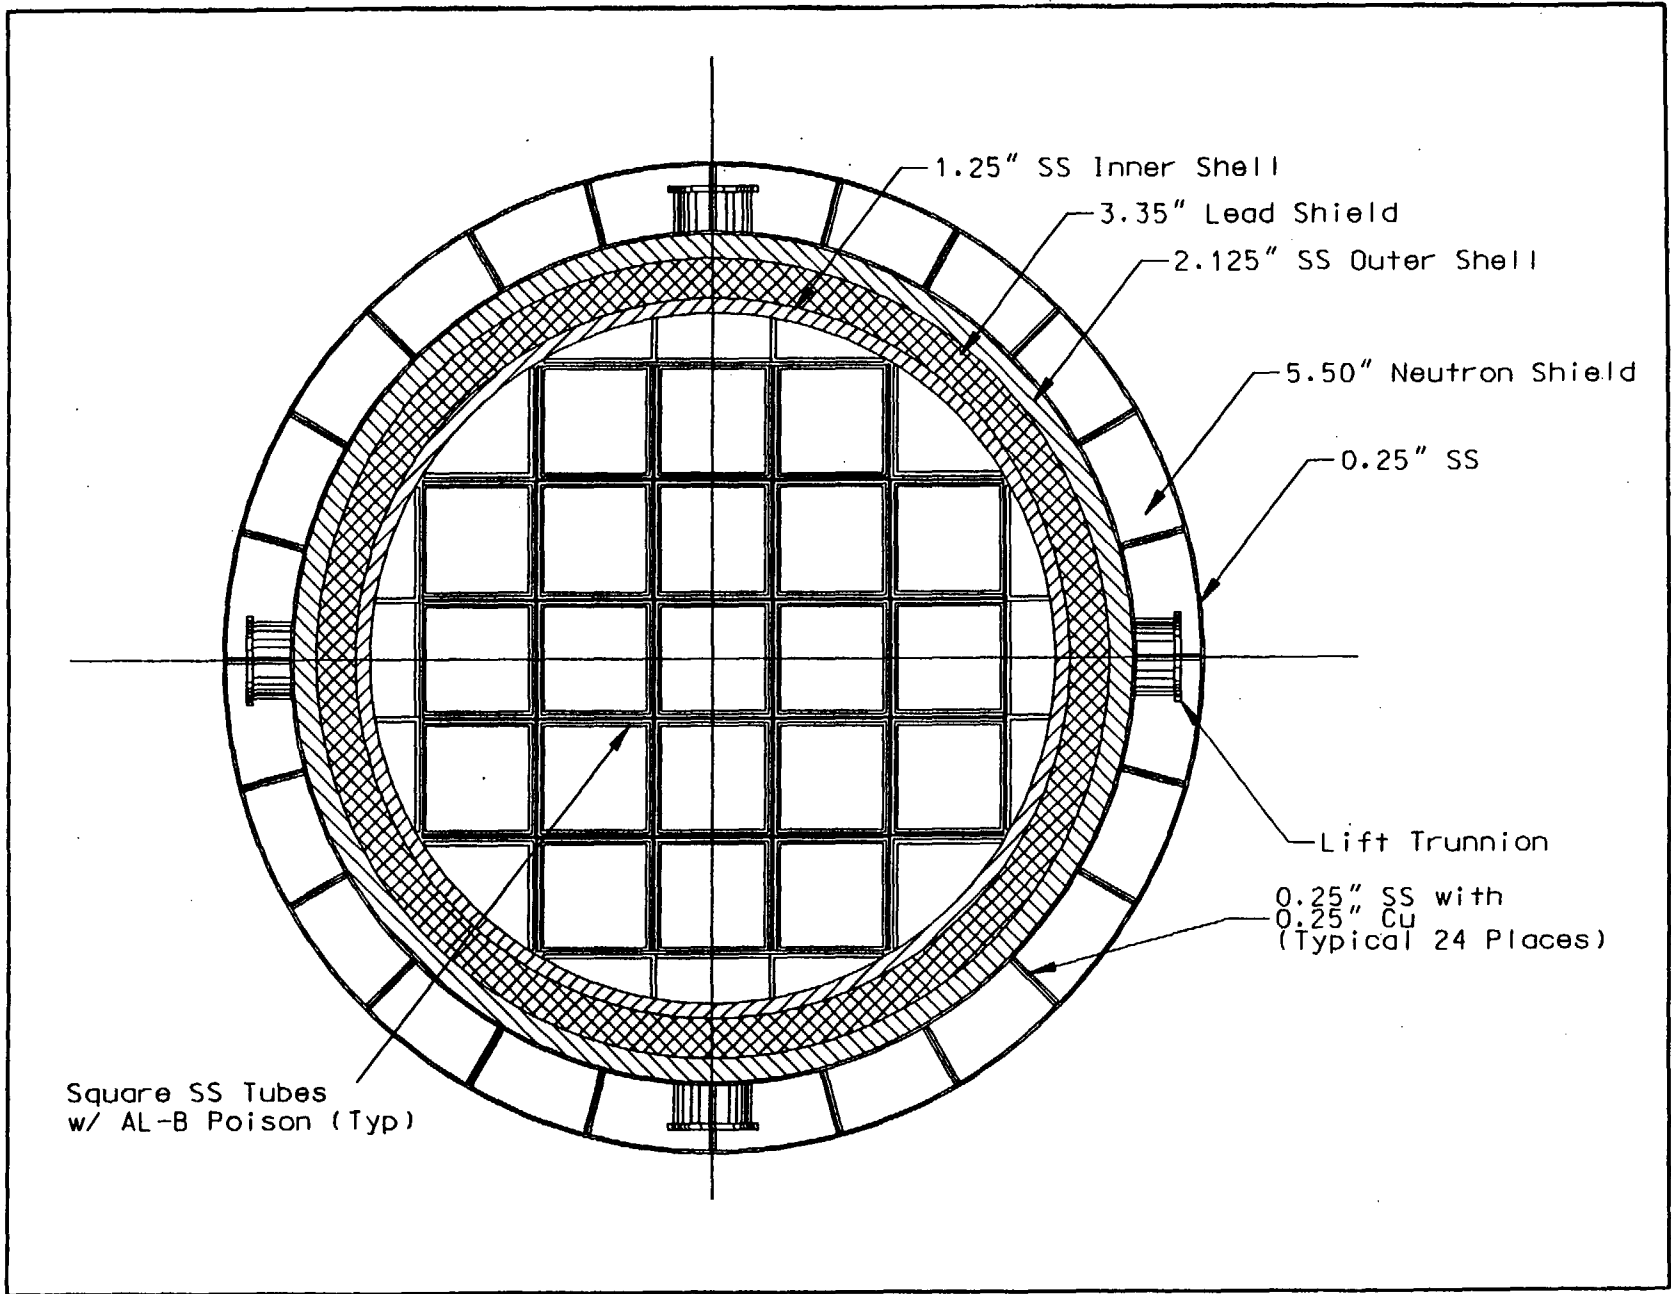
100-Ton TSC Metal Cask for 21 PWR Fuel Assemblies (End Section View) (Source: DOE95c)
